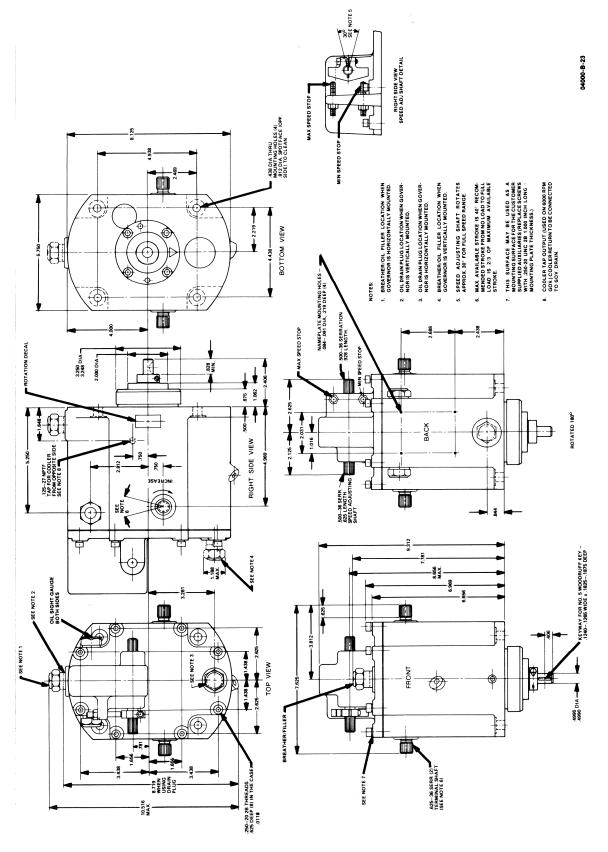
TG-13/TG-17 Outline Drawing Lever Speed Setting. Cast-Iron Case. Do Not Use For Construction
